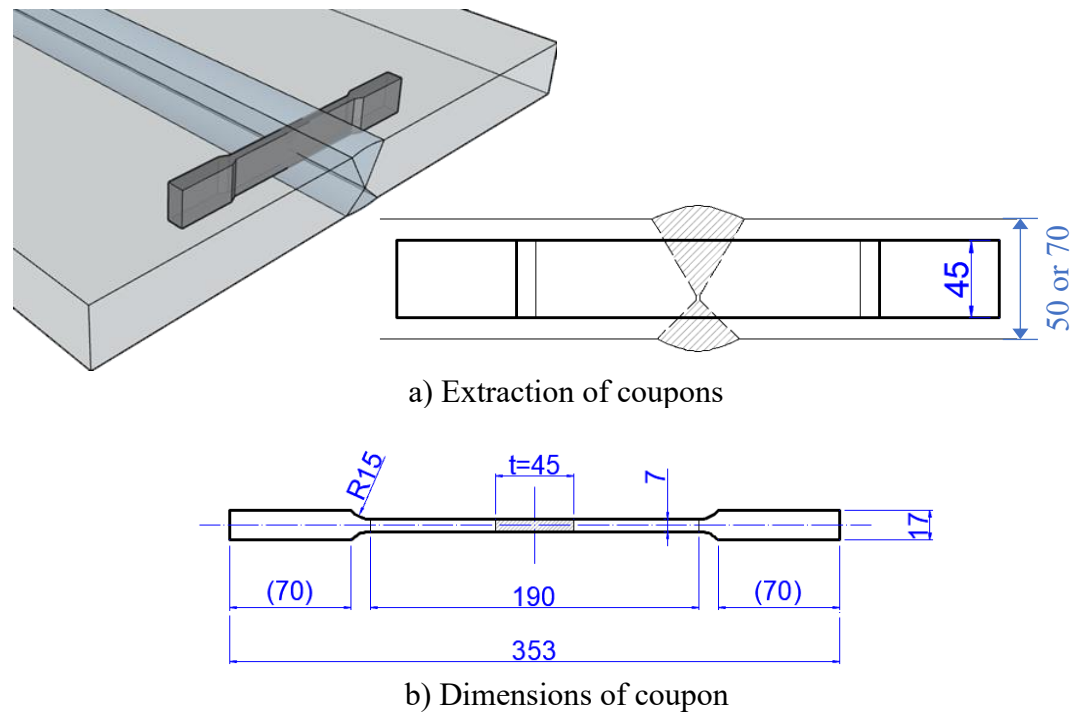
Extraction location and dimensions of S690 QT tensile test coupons
